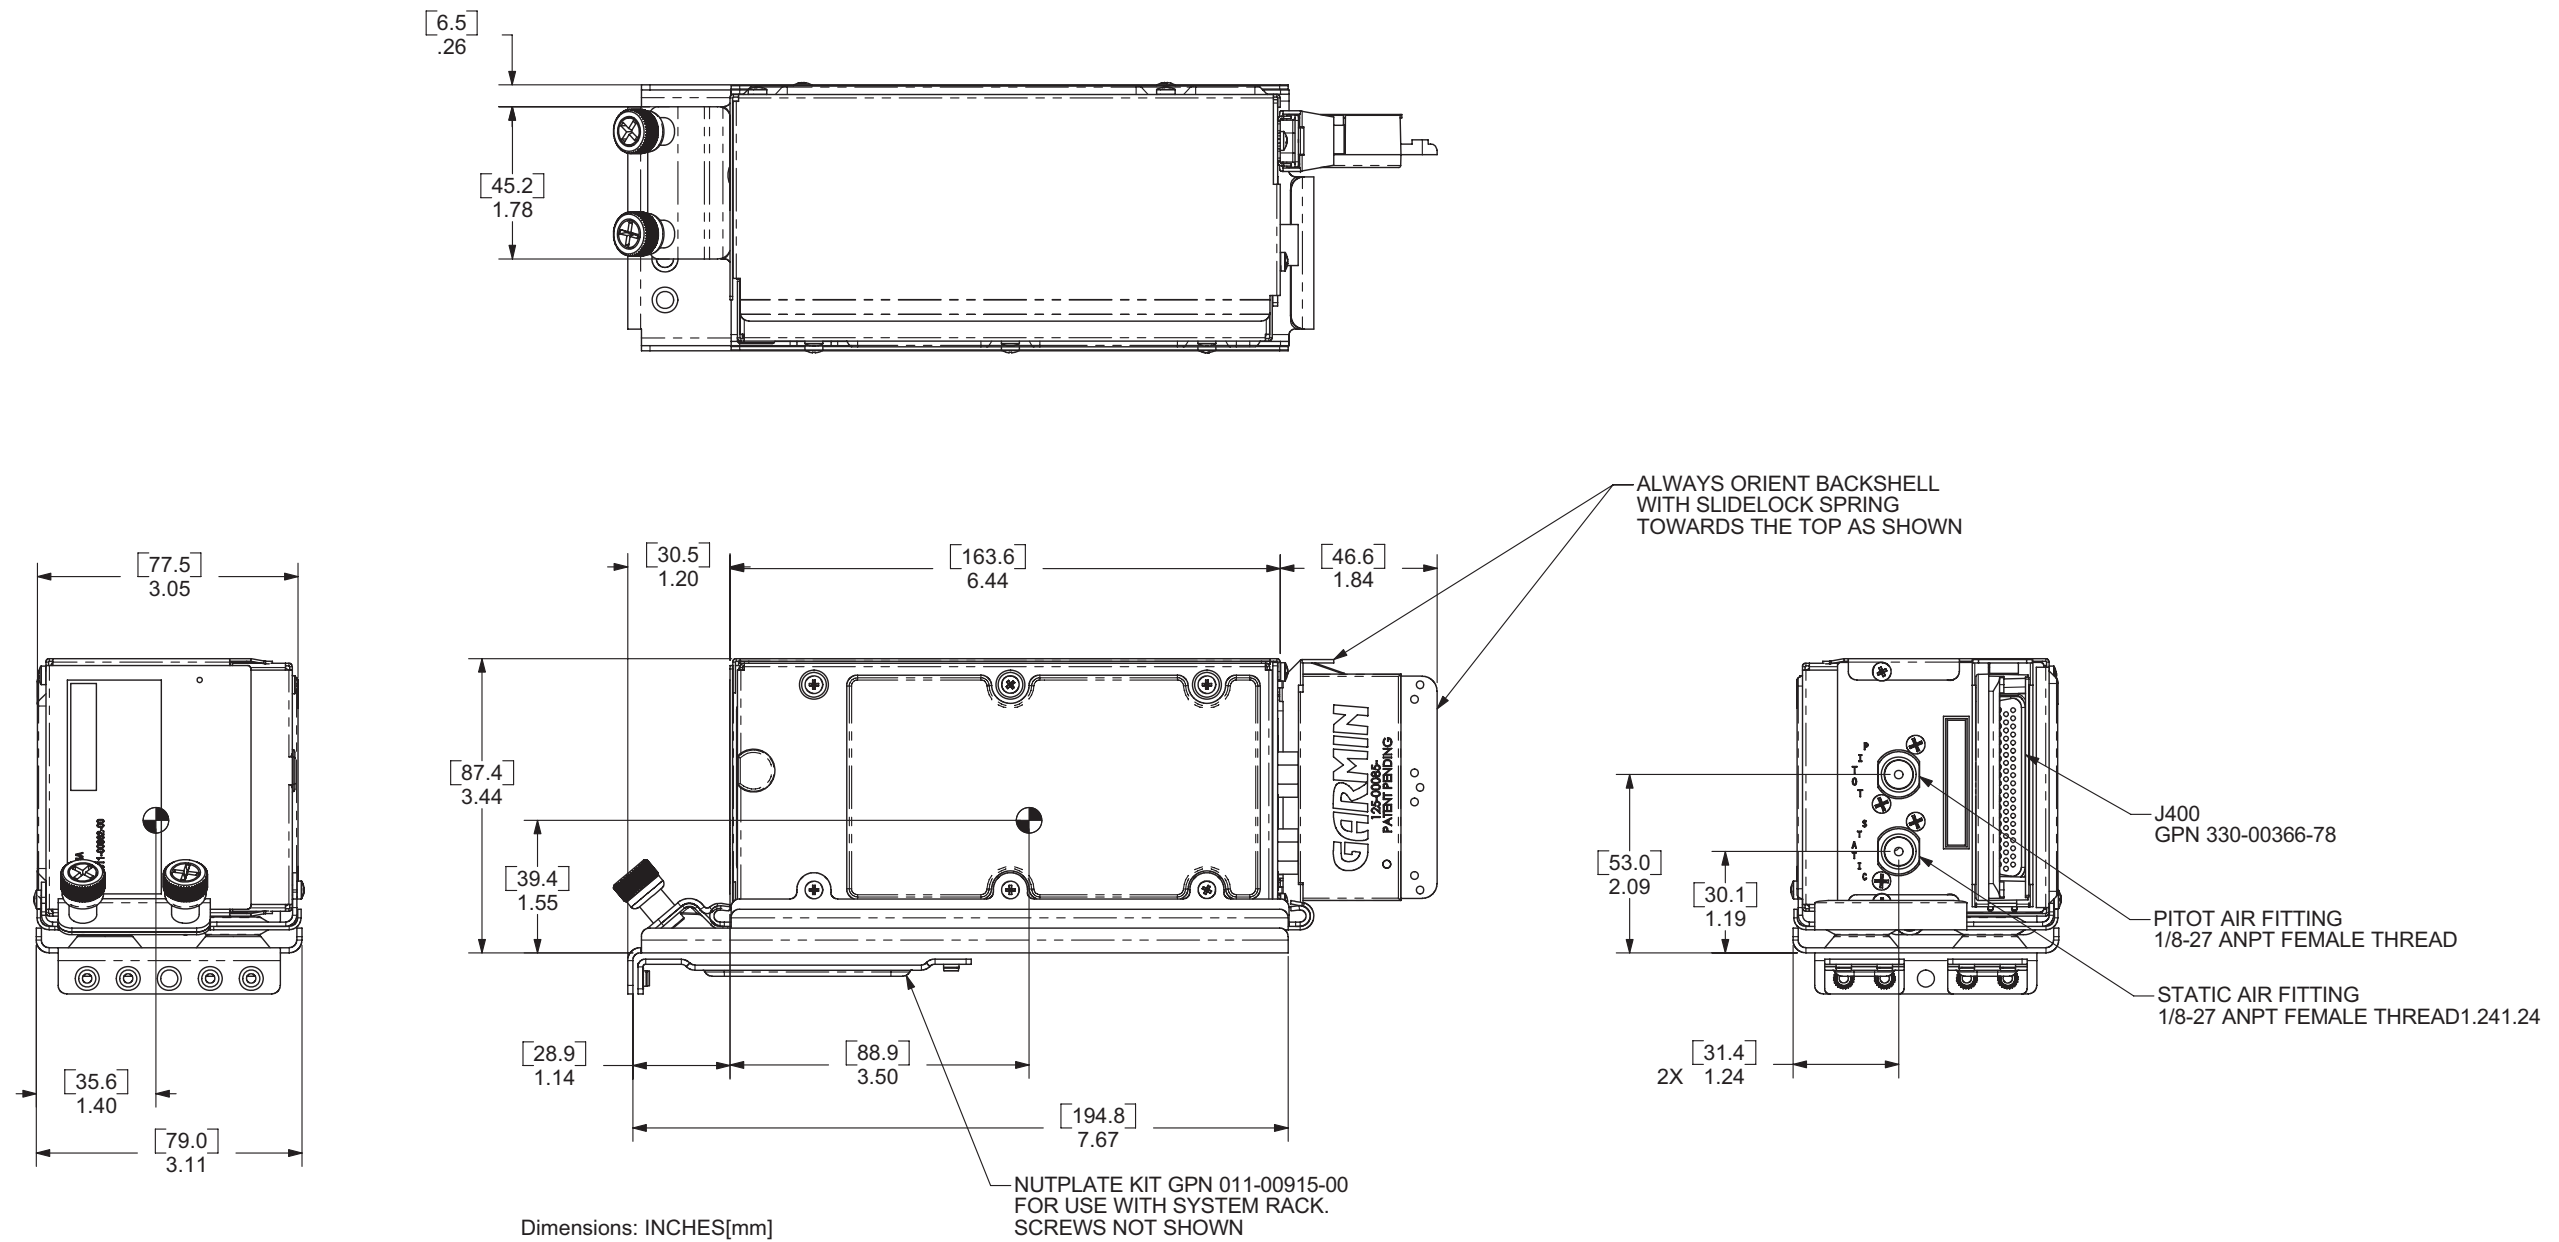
GDC 74A Outline Drawing for Rack Mounting (Sheet 1 of 2)
